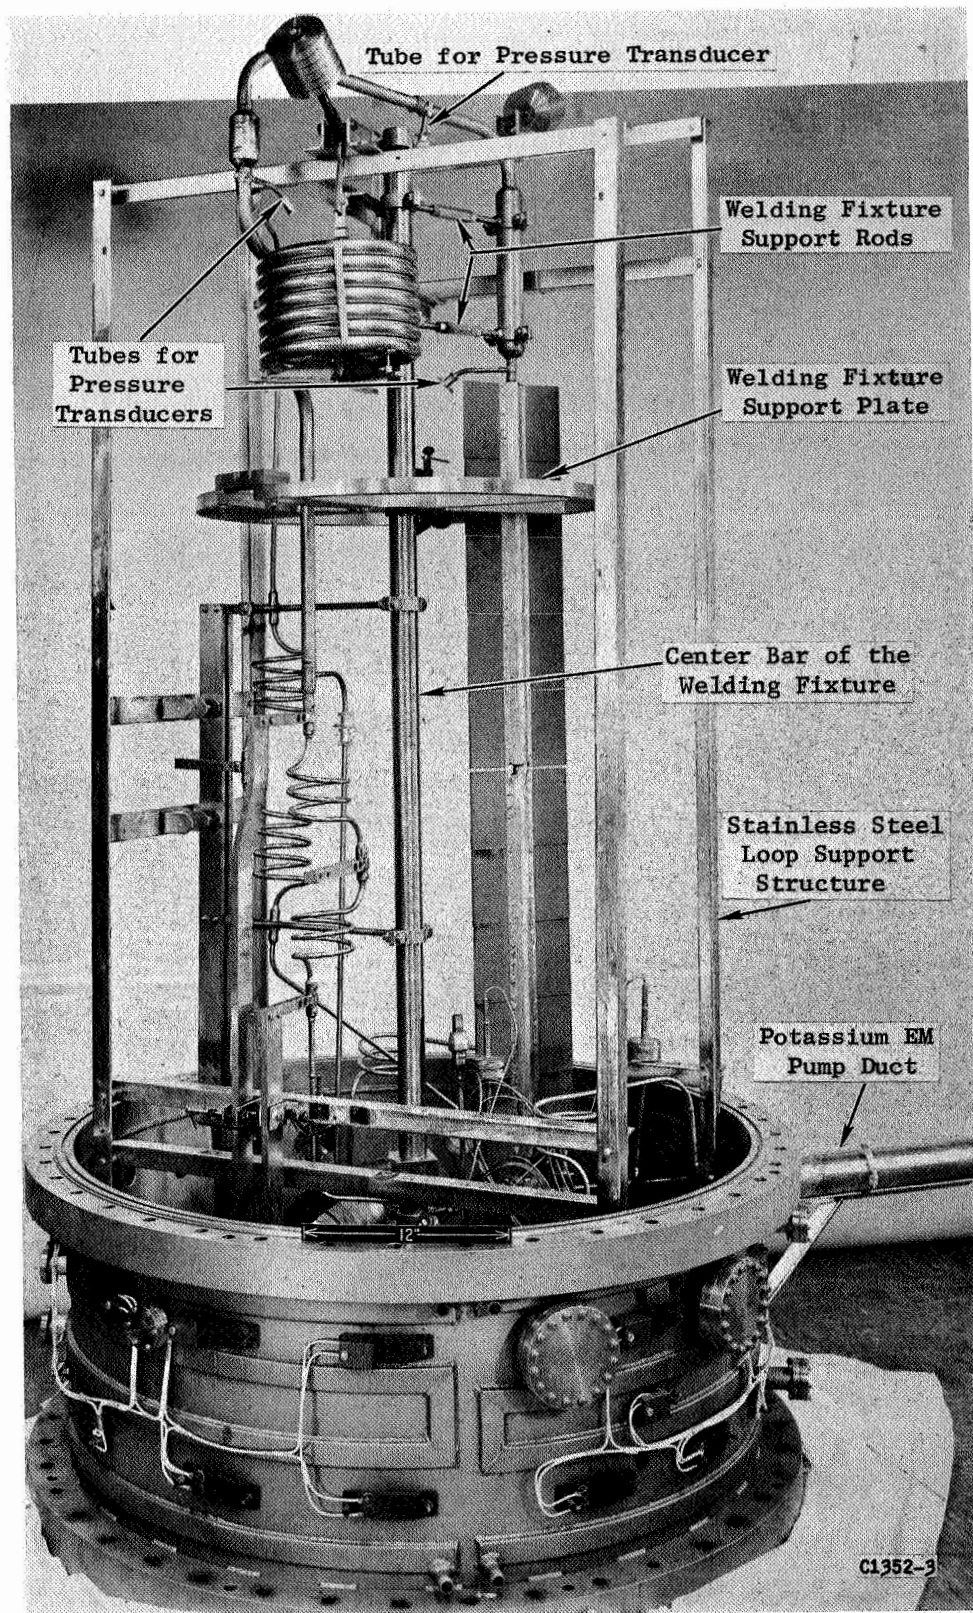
T-111 Corrosion Test Loop and Chamber Spool Piece During the Transfer of the Loop from the Support Structure to the Welding Fixture. (Orig. C67112232)
